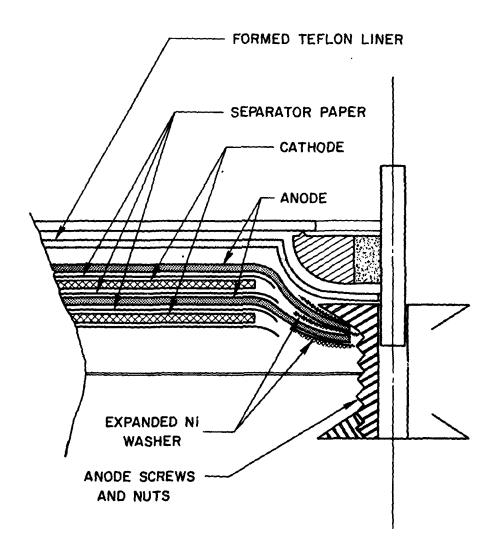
Schematic drawing of the interior of a flat cylindrical cell.
